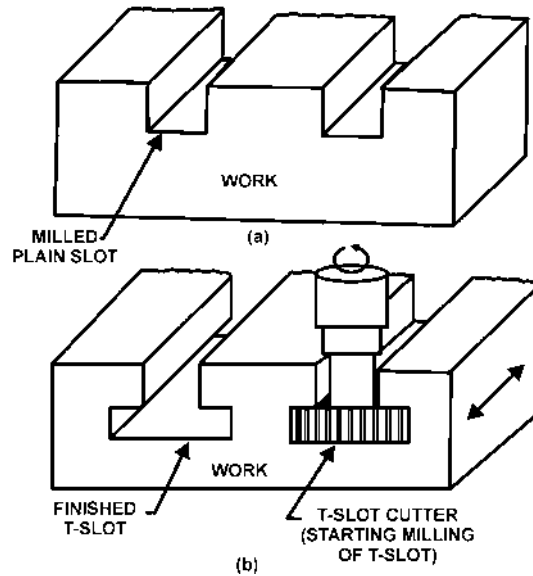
, Milling a T-slot, using a T-slot milling cutter
